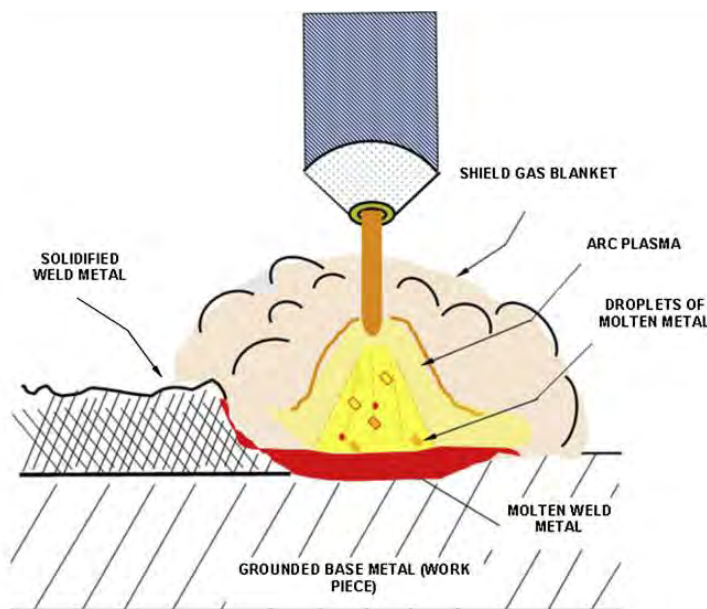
Illustrate of Gas Metal Arc Welding (AWS, 2001).
